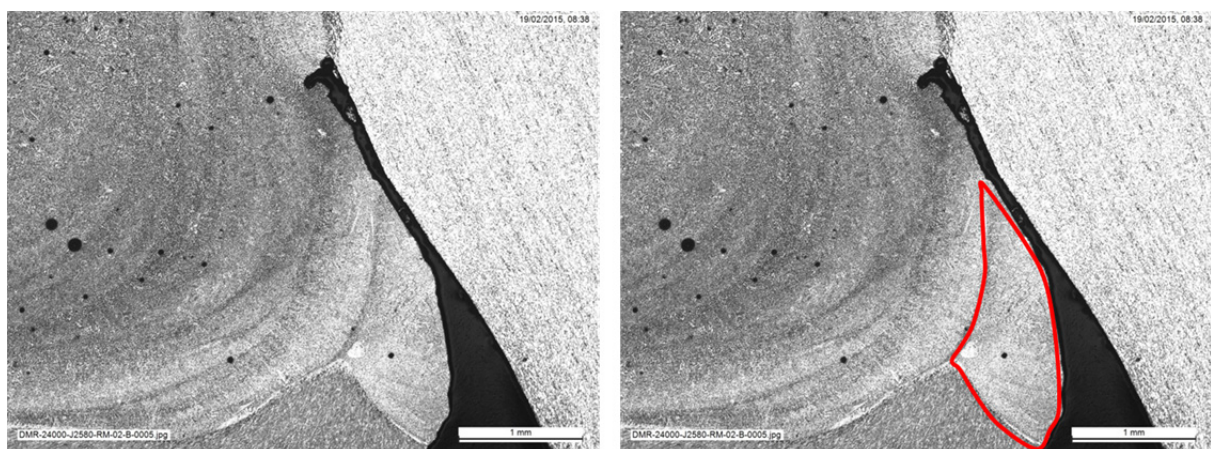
Micrograph of the rim joint weld for sample 2-B from J2580. On the right frame, the red contour encloses the apparent previous weld pass or start-stop welding position. The length scale is 1.0mm.
